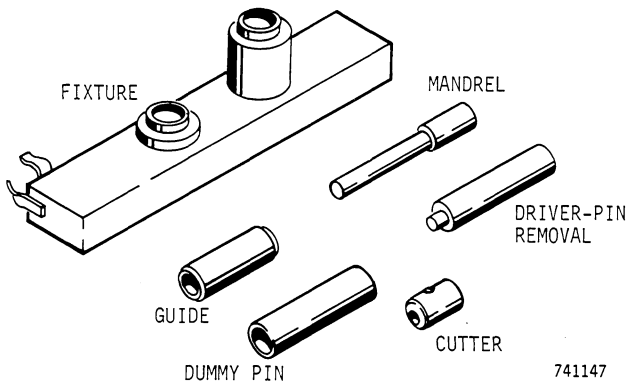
D62919 Tool Kit for Wrist Pin Removal and Installation
